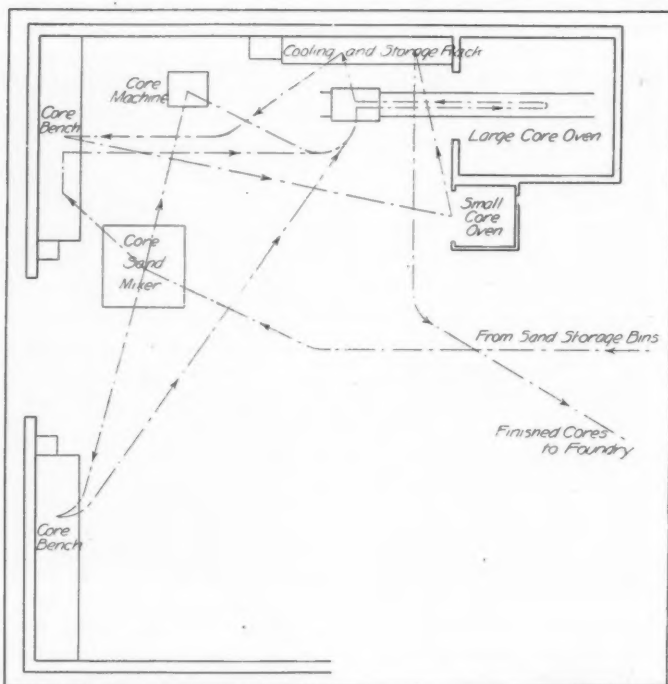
LAYOUT OF OLD FOUNDRY CORE ROOM
